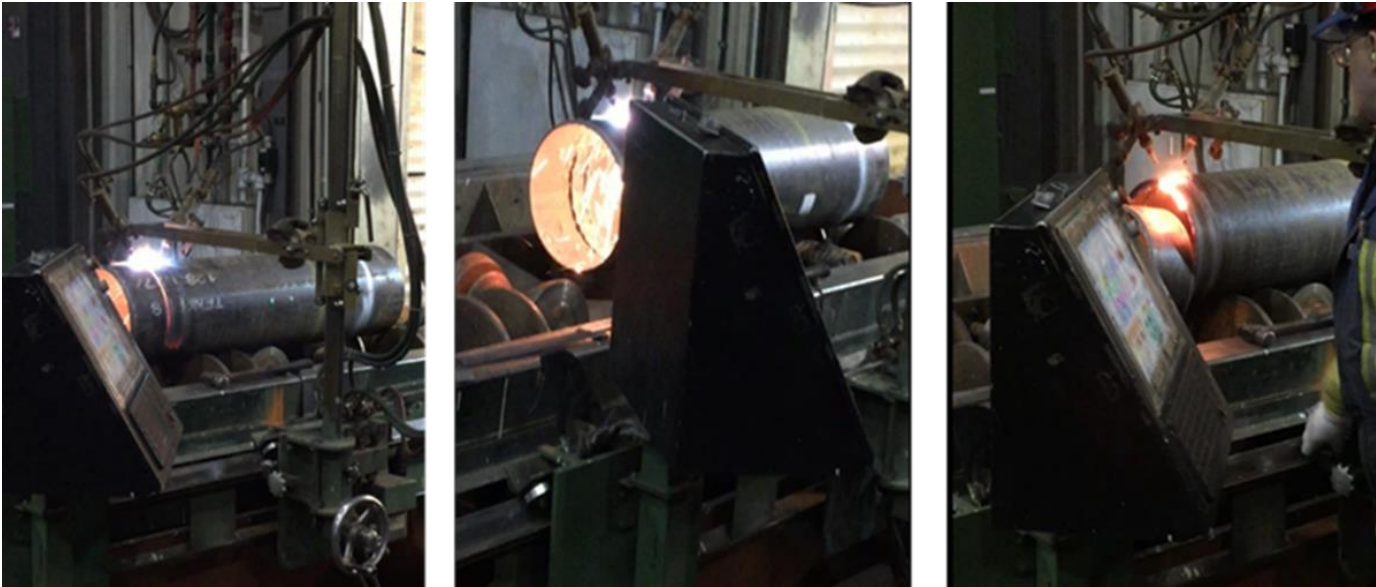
Pipe spools will be cut based on the issued cut-length and placed on the wrack for fabrication.
